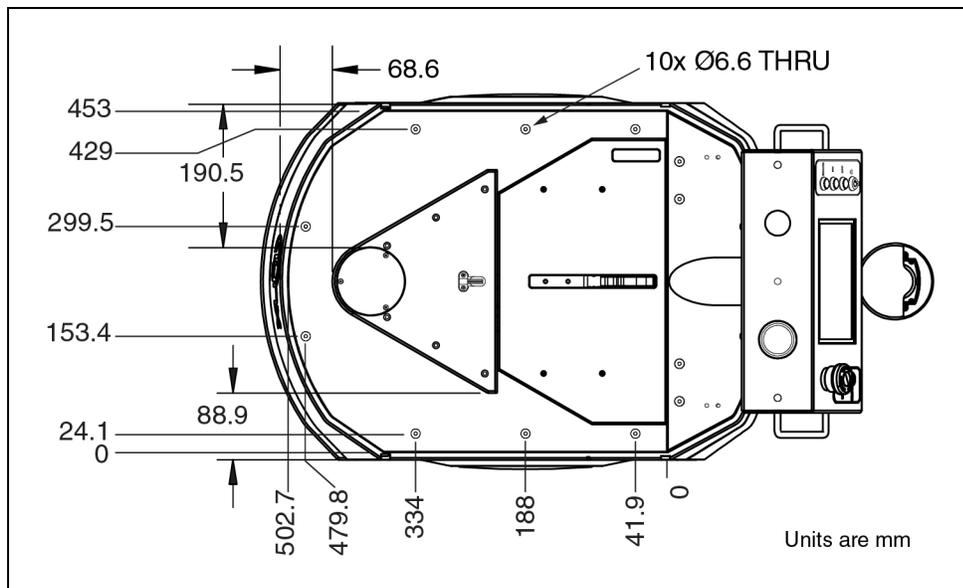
Coupling Plate Dimensions, Arms Removed
